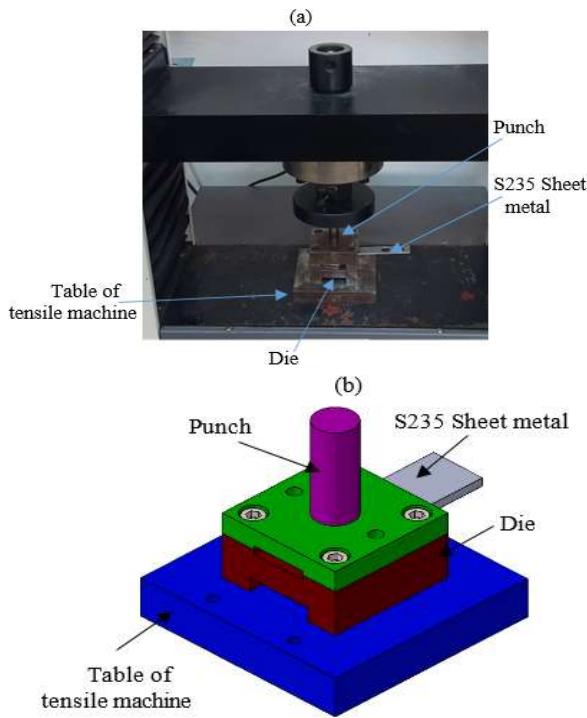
Experimental punching tool: (a) Tools and strip during punching test; (b) 3D design of punching tool
